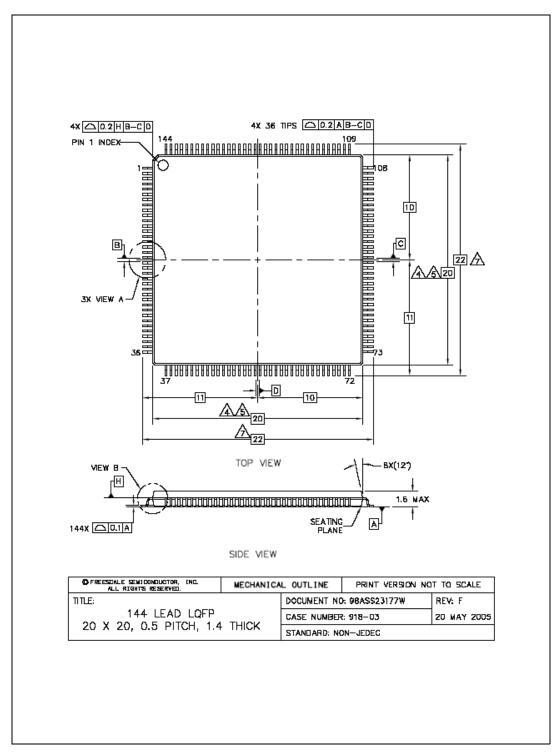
144 LQFP package mechanical drawing (Part 1 of 2)
